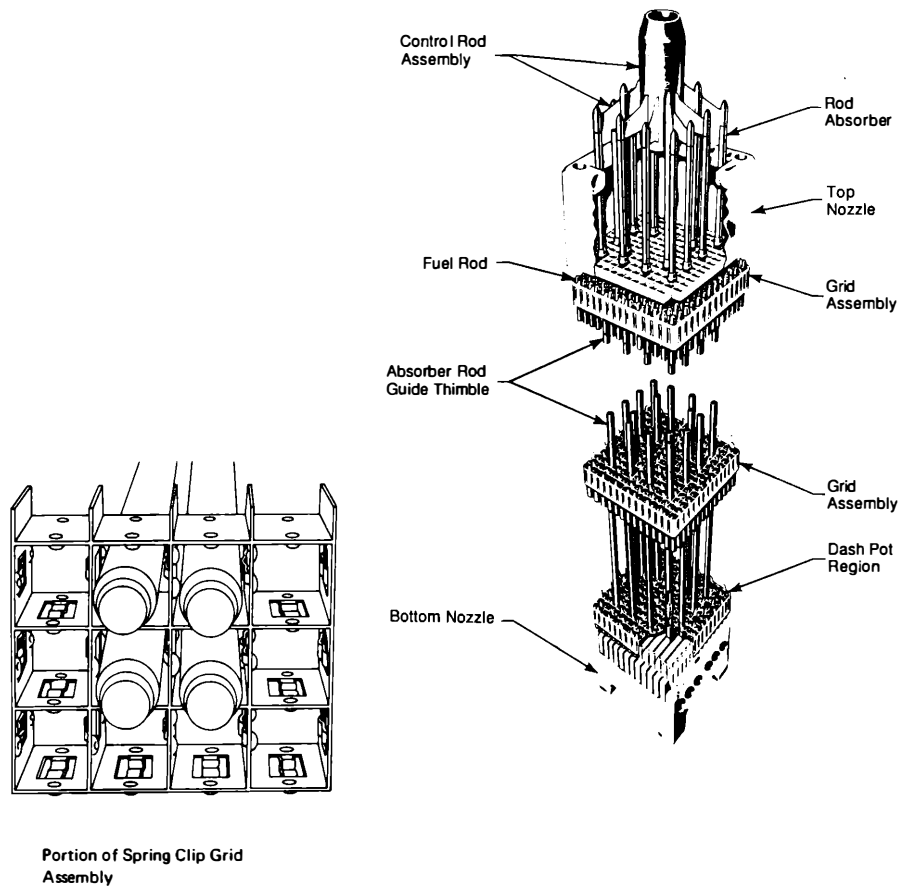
Typical spacer grid for a light-water reactor fuel assembly. (Courtesy of Westinghouse Electric Corporation.)
